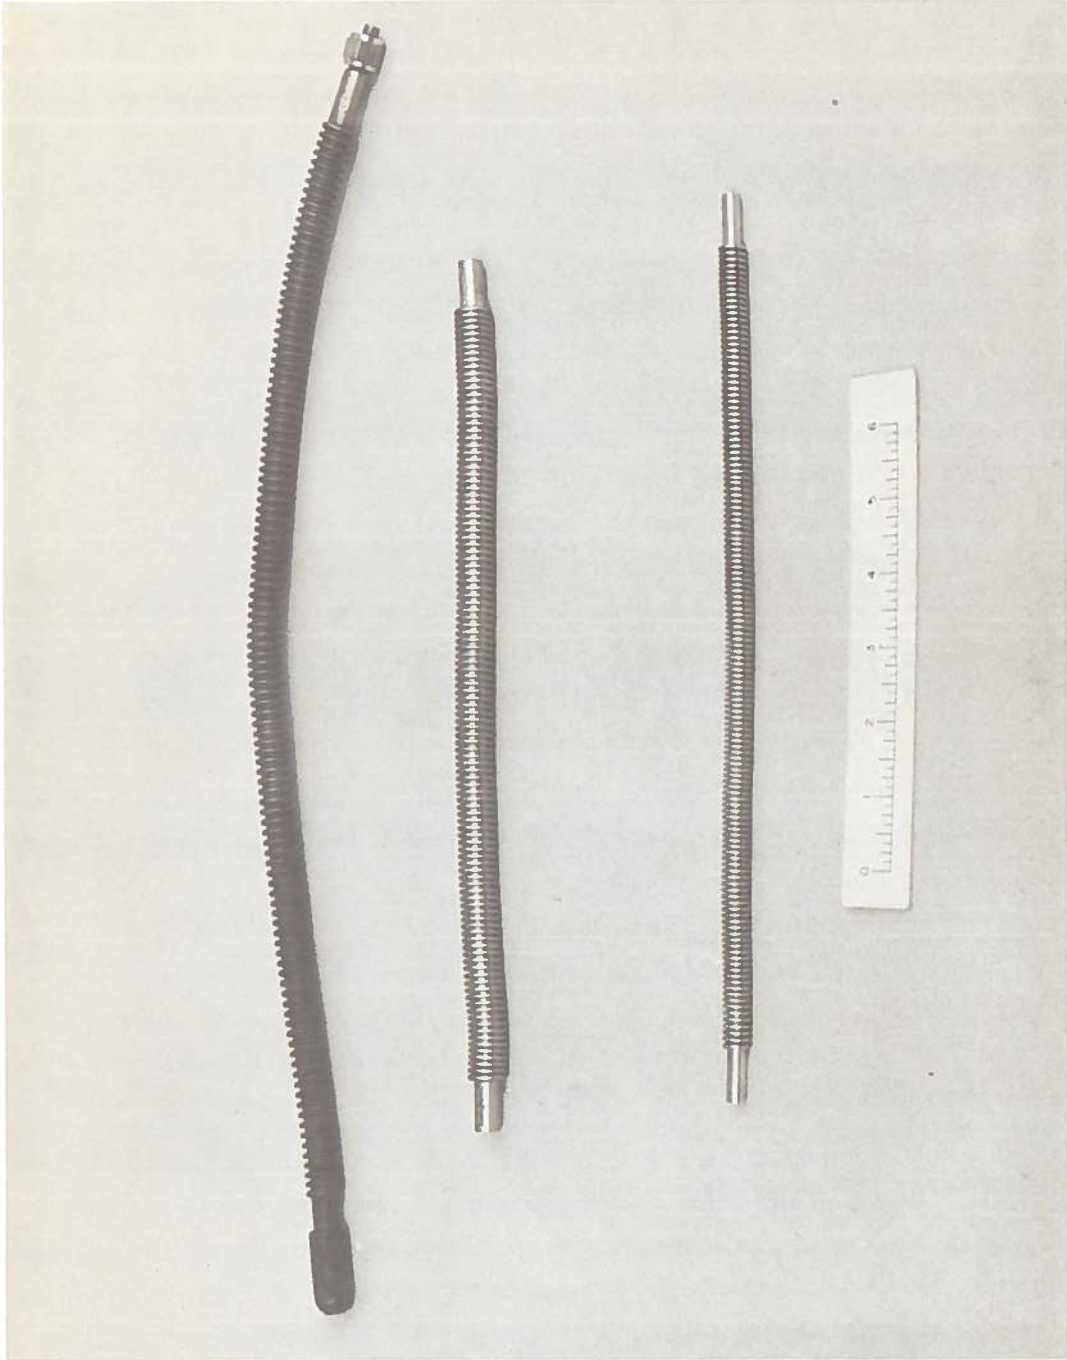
Flexible Coaxial Exhaust Sampling Probe With Major Components
